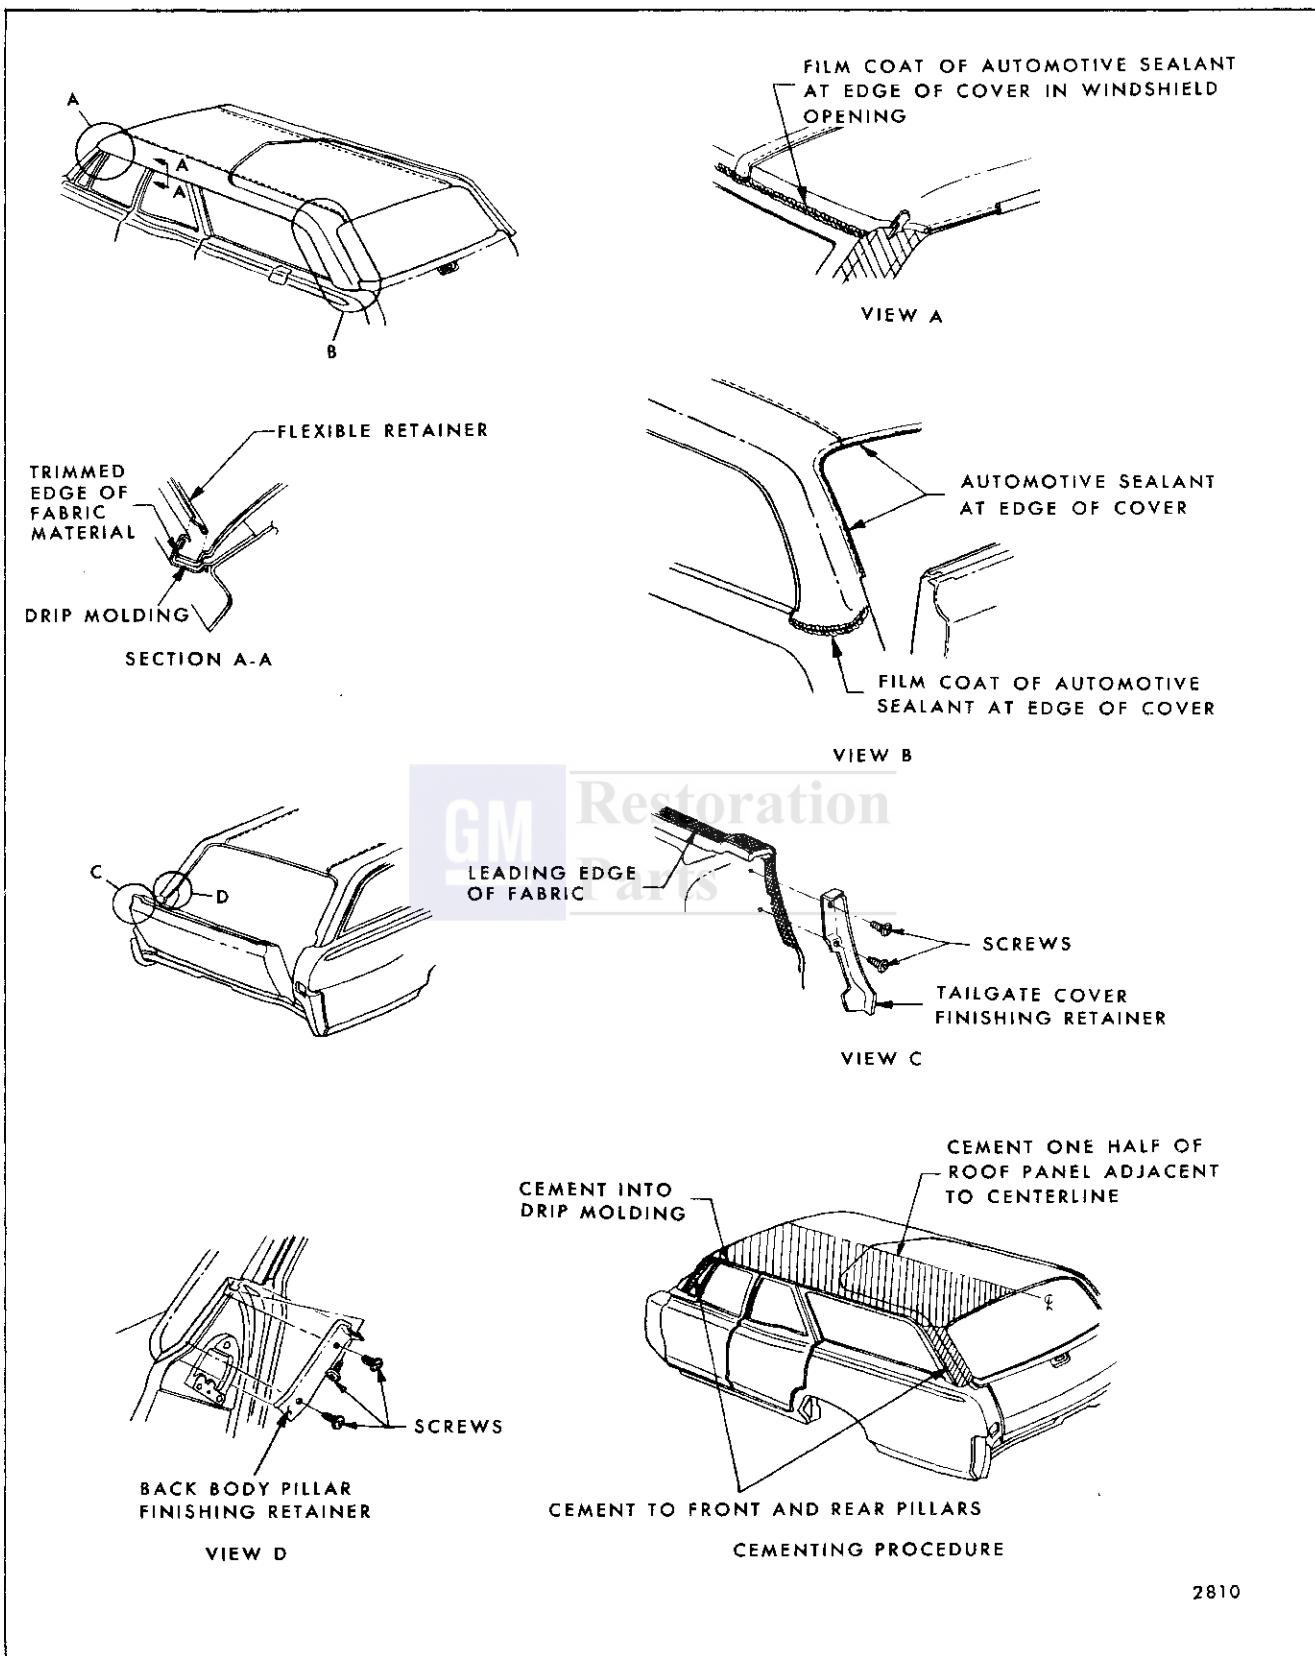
Typical Fabric Roof Cover Installation on Station Wagon Styles
